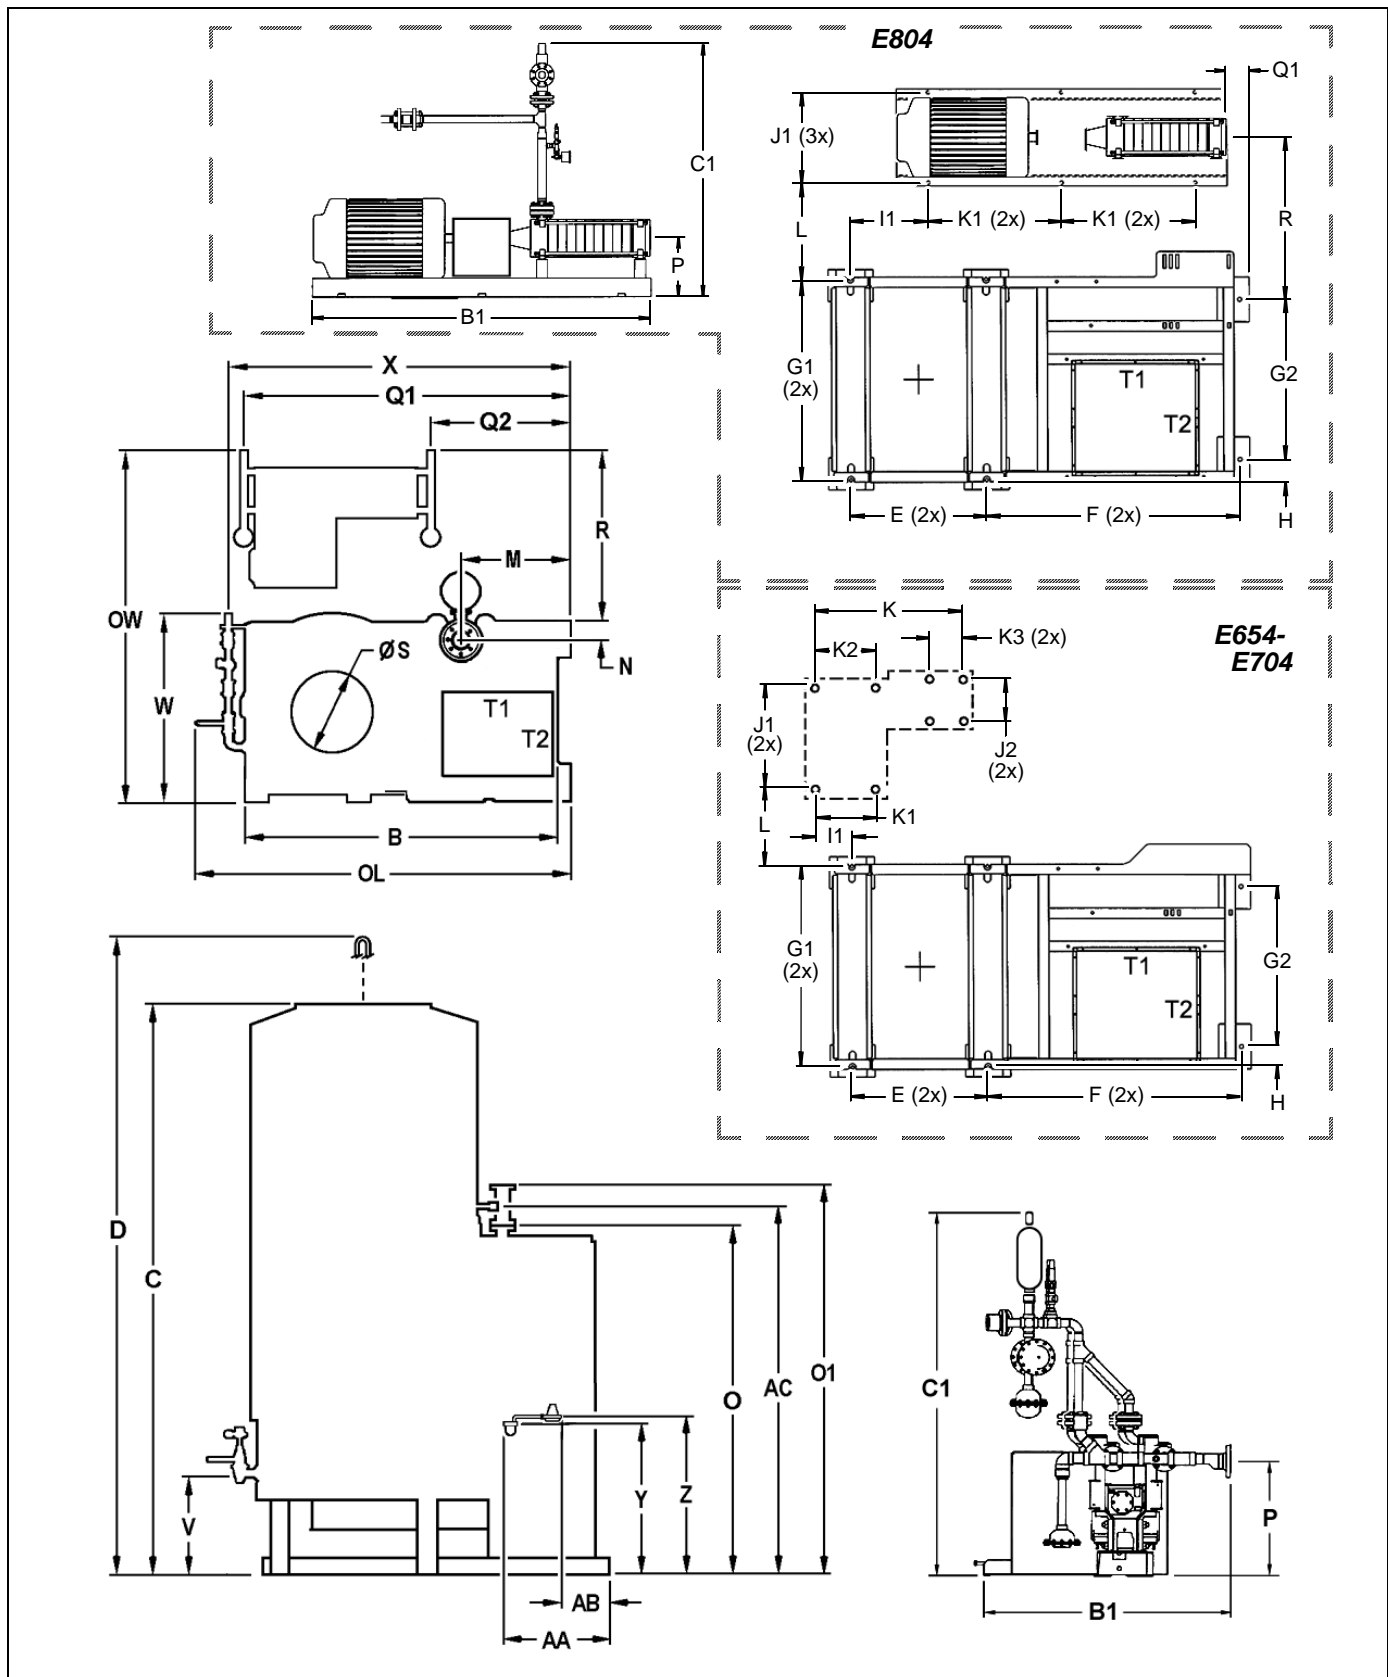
Equipment layout for E654–E804 modulating steam generators
